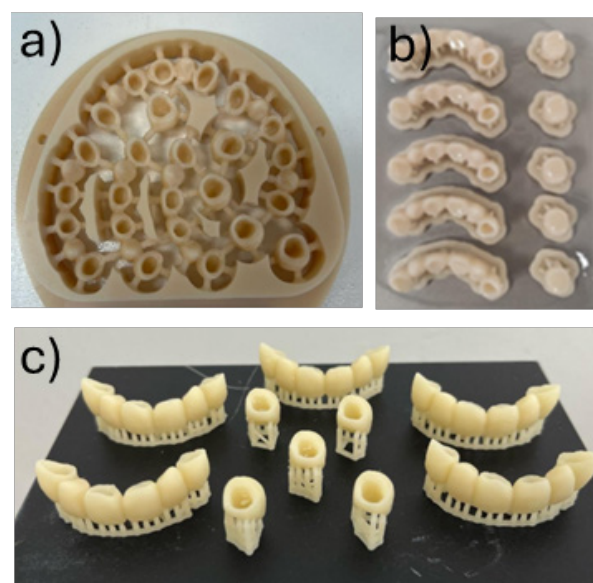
Manufactured samples produced by CNC milling (a) and 3D printing (b, c).
